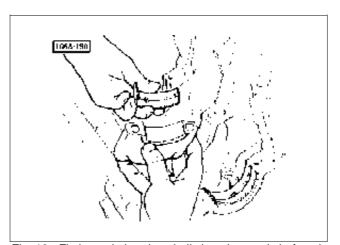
Fit the main bearing shells into the crankshaft main bearings. (All main bearing shells are provided with a ratchet. This ratchet should be completely engaged in its seat);
